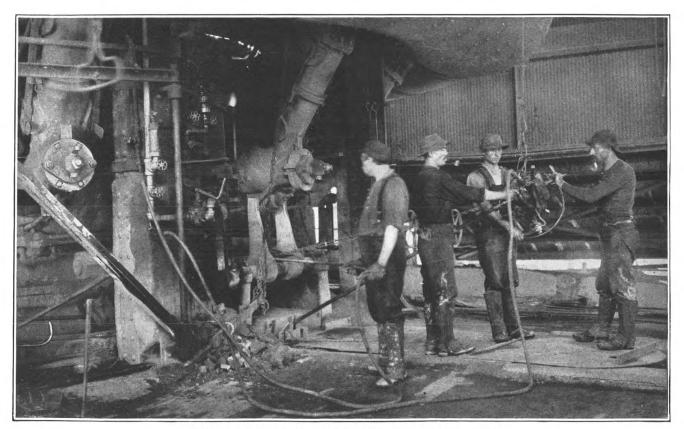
IMPROVED METHOD OF DRILLING A TAPPING HOLE.
